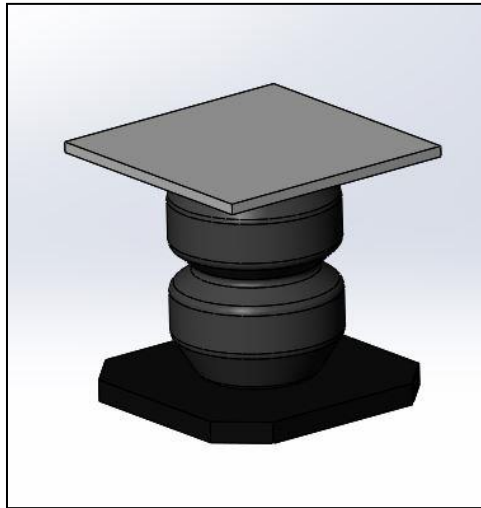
Plastic Shim, Rubber Spring and Spring Center Plate
